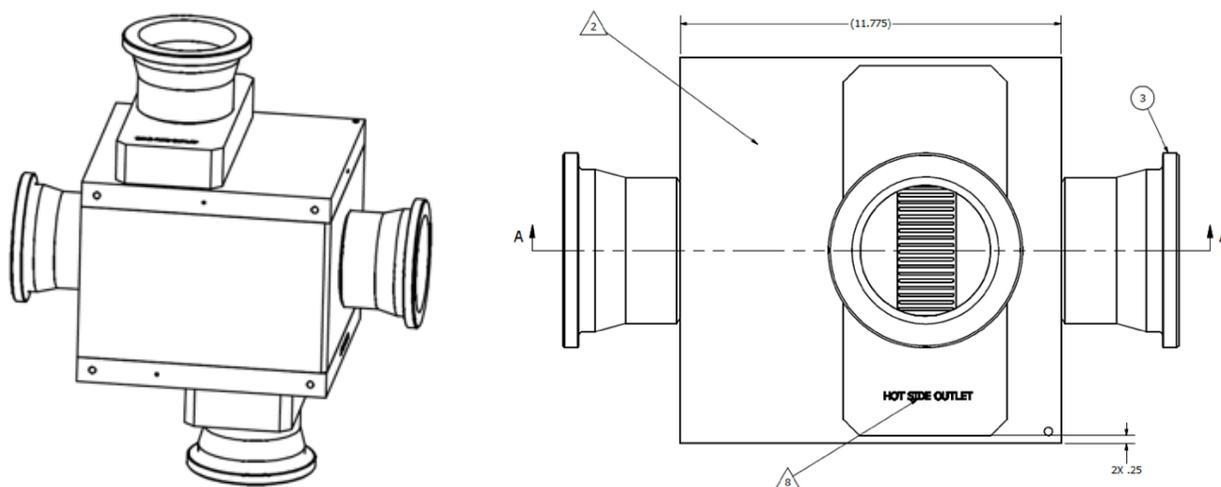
Isometric and Plan Views of HEXCES CPHX
